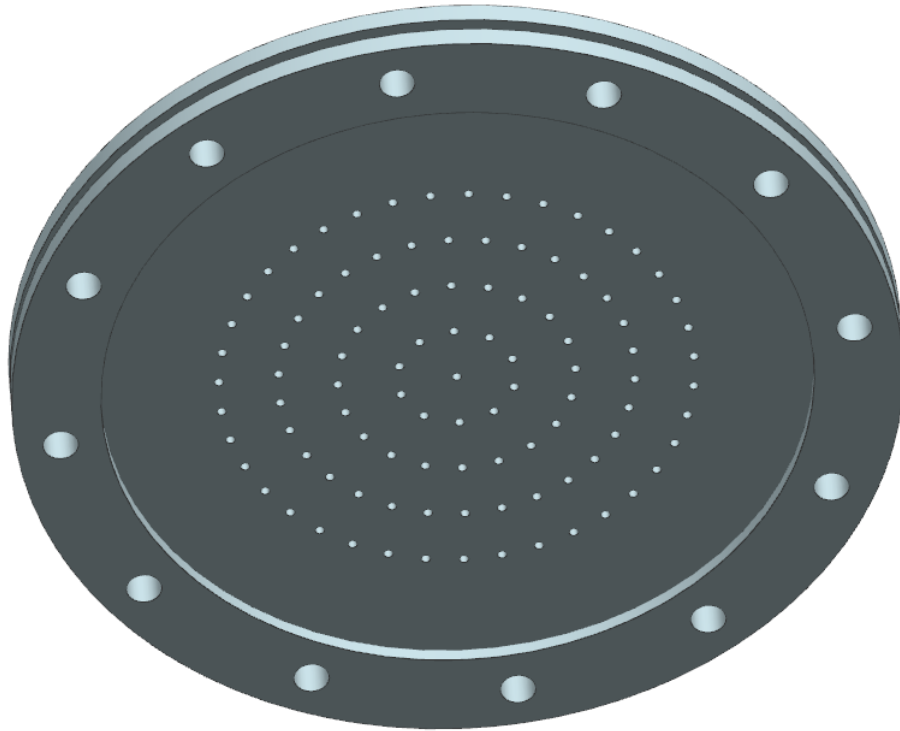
The oxidizer injection plate- "shower head" type, shown from the combustion chamber side
